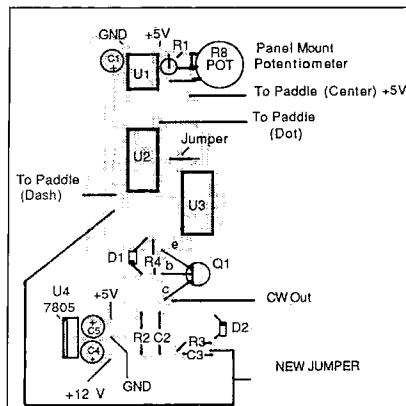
Location of the new jumper wire (shown in red) for the Mini-Keyer.
